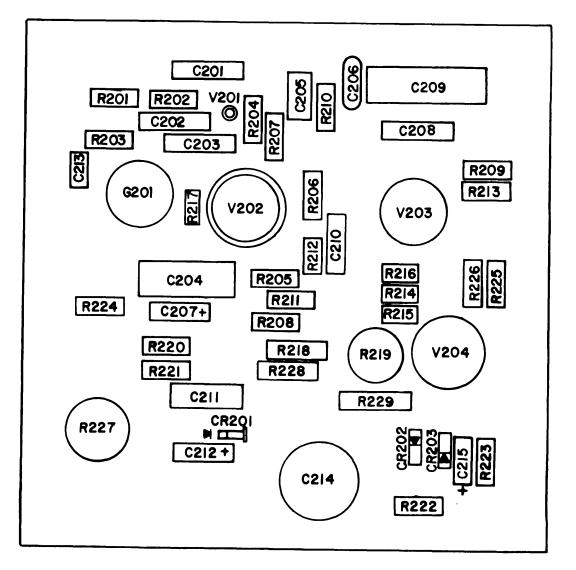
Voltmeter, Electronic ME-161A/U, Circuit Board Assembly, (Sheet 1 of 2).
